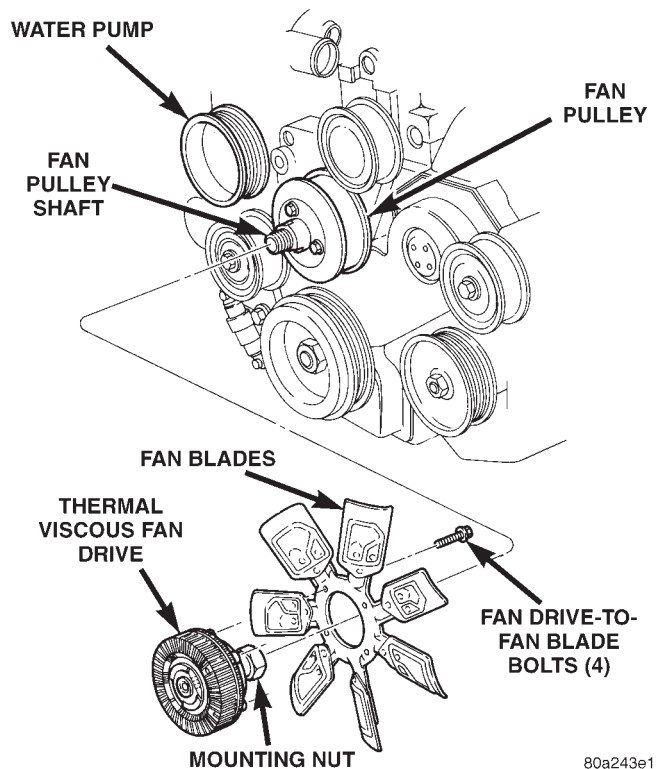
Thermal Viscous Fan Drive and Blade Assembly
